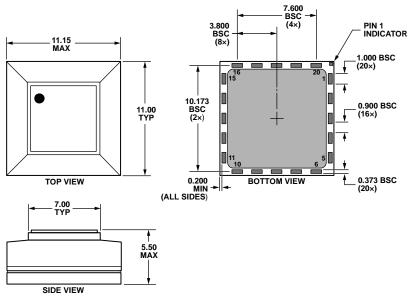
20-Terminal Stacked Land Grid Array [LGA] (CC-20-1) Dimensions shown in millimeters
